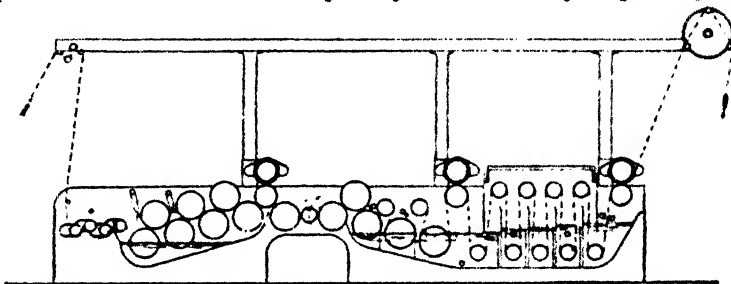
Descriptive drawing of Benninger chainless-padless machine, N.M. 111.
